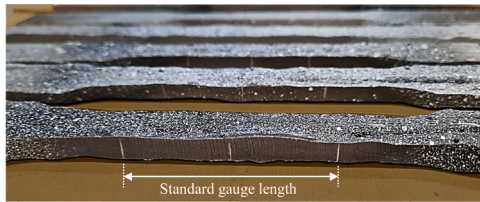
Standard gauge length marked on the side of WAAM coupons.
